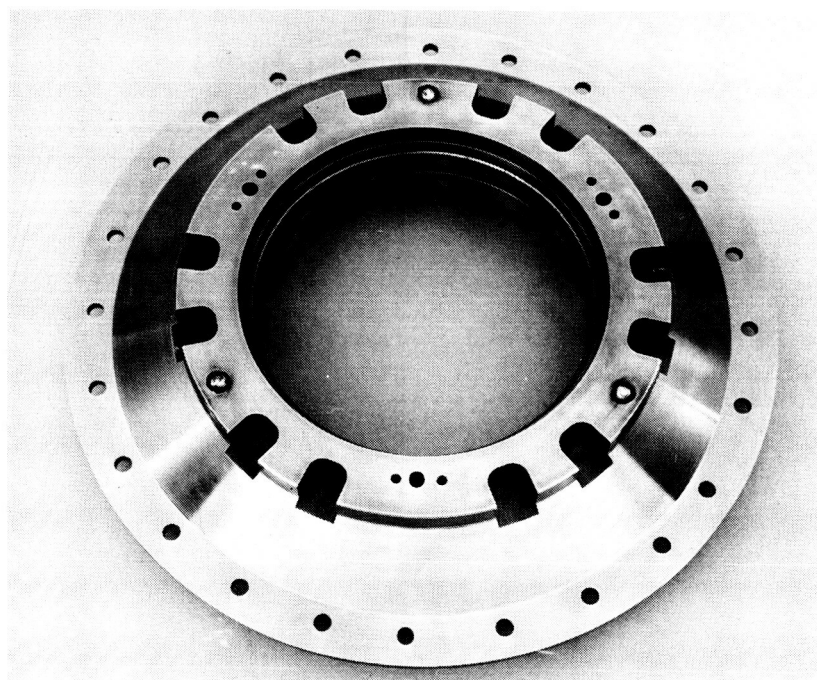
Seal Carrier from the Orifice-Compensated Externally Pressurized Seal Showing the Three Inlet Holes for the Pressurizing Air Supply
